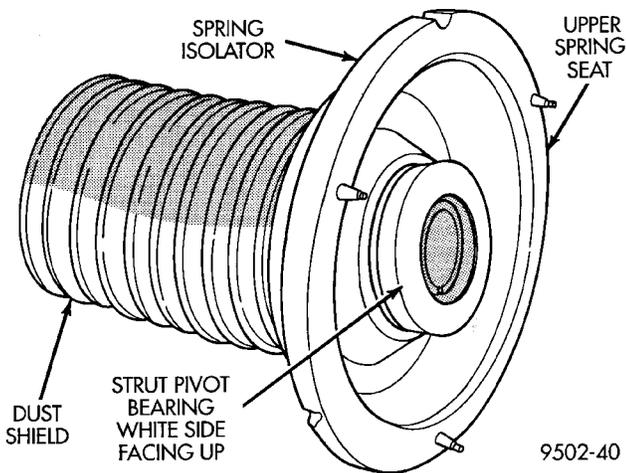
Upper Spring Mount And Isolator Assembly Components
